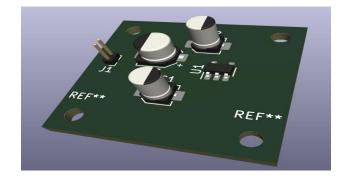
3D model of the PCB design of the linear voltage regulator using KiCAD
